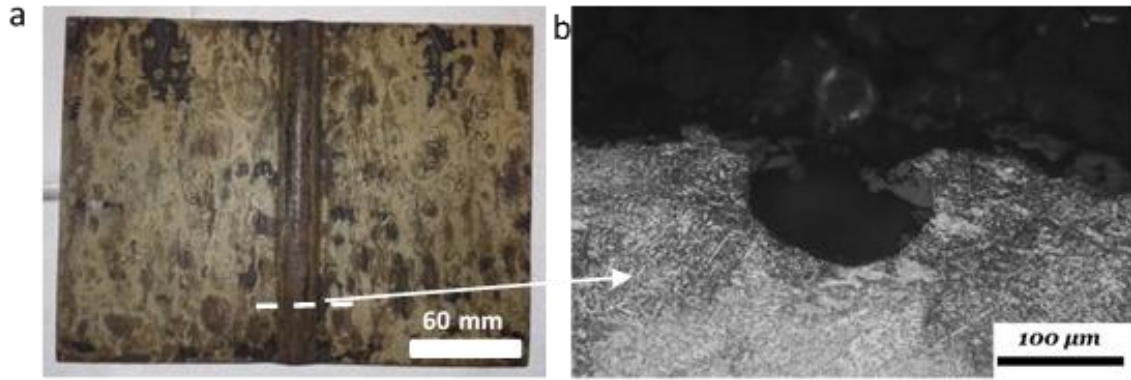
S355J2+N: (a) Specimen surface after salt spray test. Dash line indicates the area of the metallographic examination on transverse cross section; (b) Morphology of pitting corrosion at the weld metal
